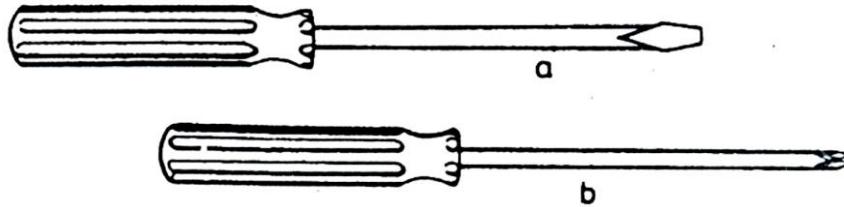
Screw Drivers - (a) Flat (b) Star
